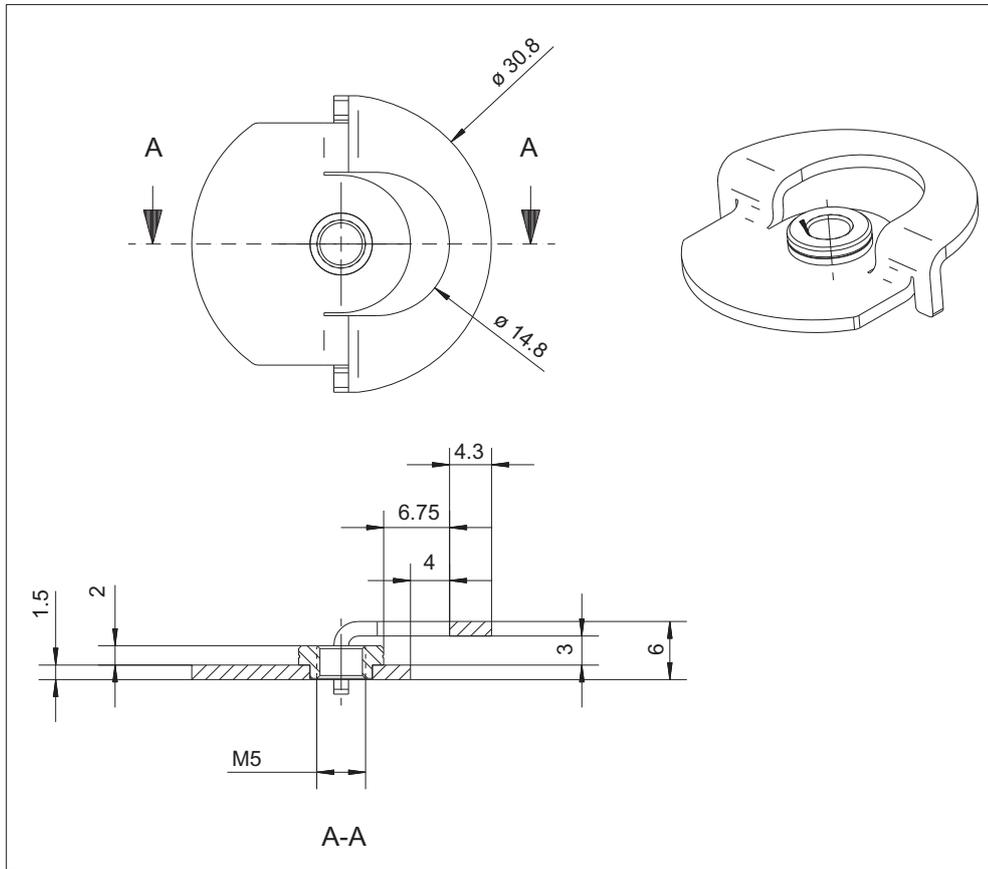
Dimension drawing of the HT 2 mounting bracket
